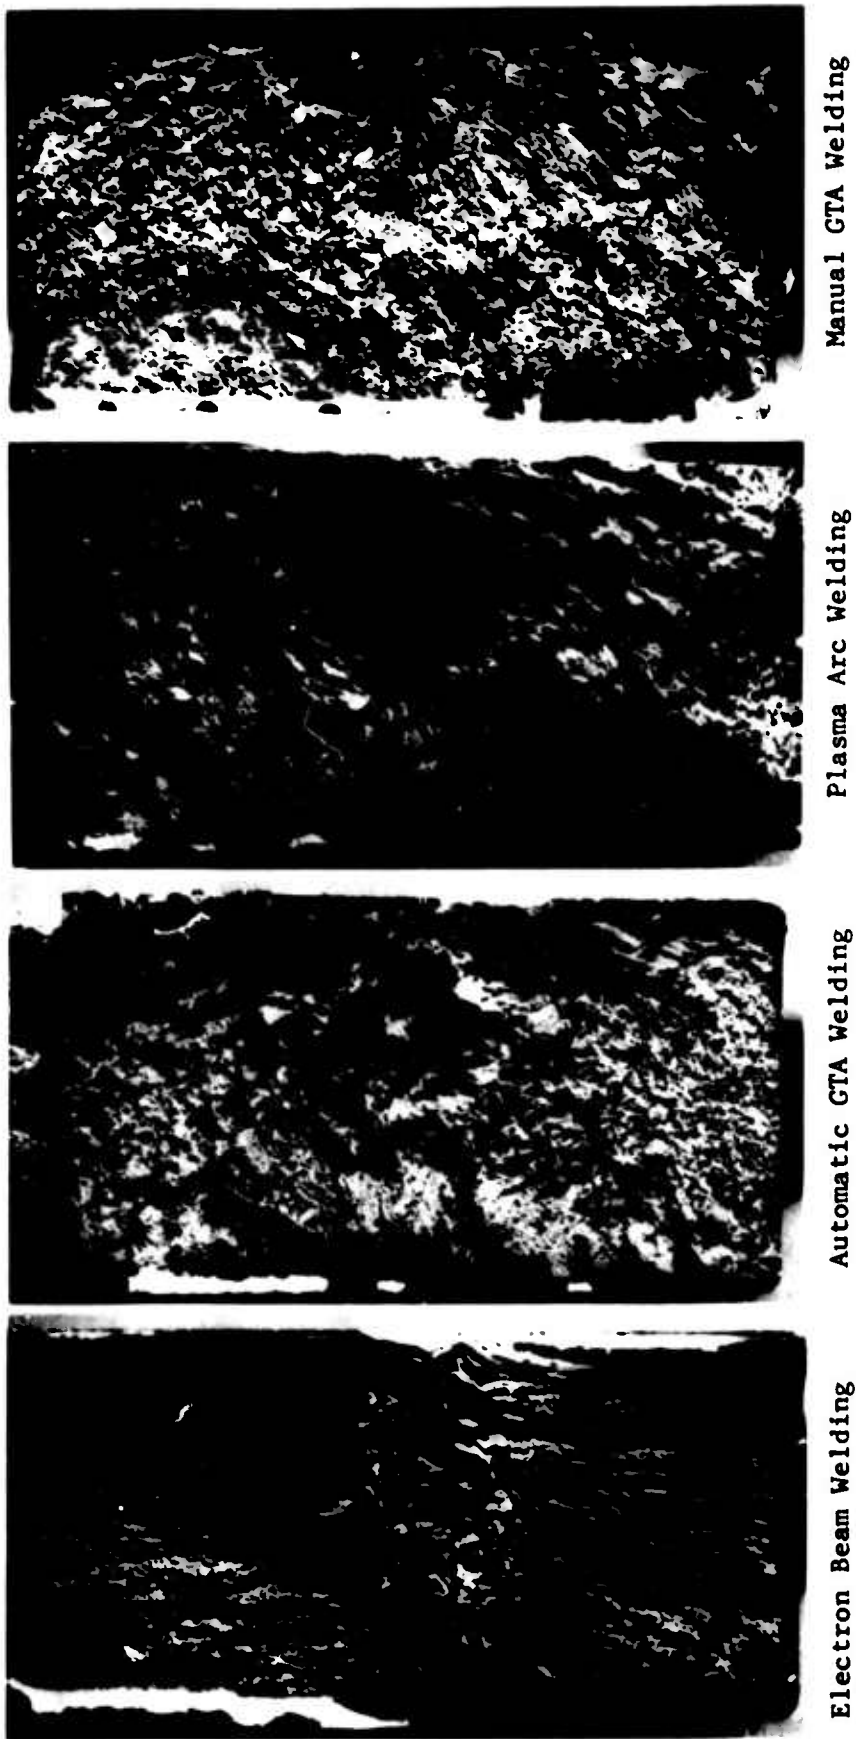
FRACTURE SURFACE OF THE FATIGUE TESTED SPECIMENS
